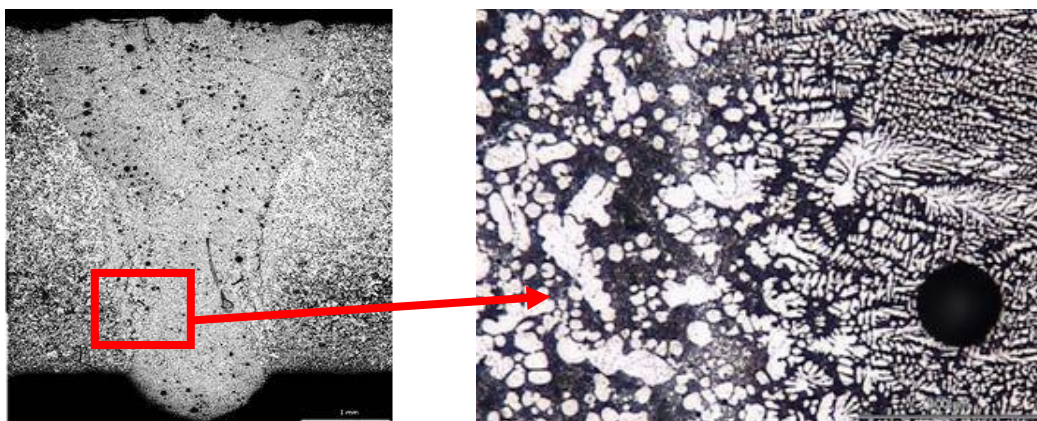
LBW welding seam on a 4 mm wall-thick plate in Silafont[®]-36.
